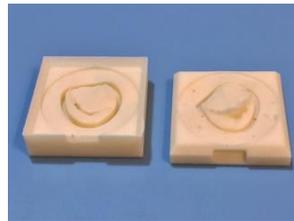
3D-printed bottom mold (left) and top mold (right) for a mitral valve (step 3).
